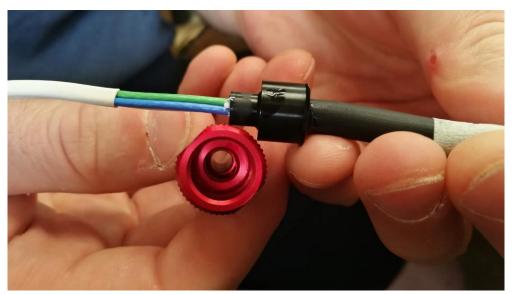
Cable Penetrator with poor adhesion to aluminum cable penetrator.
